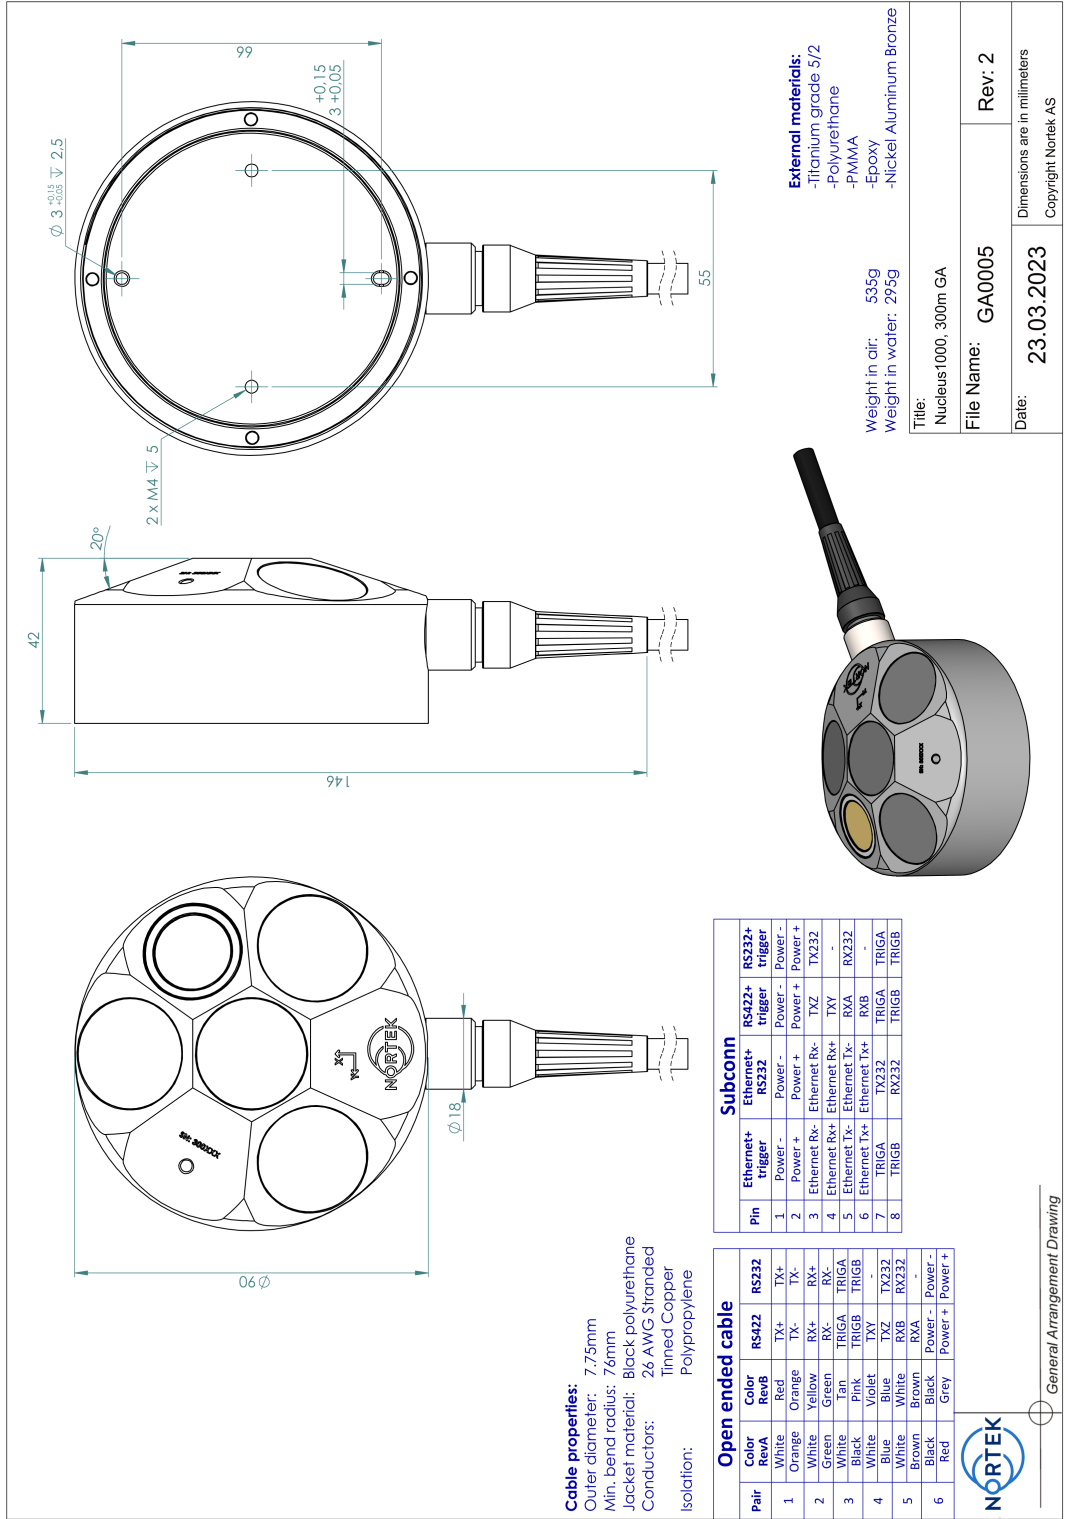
Mechanical Drawing of Nucleus1000 (300m)
